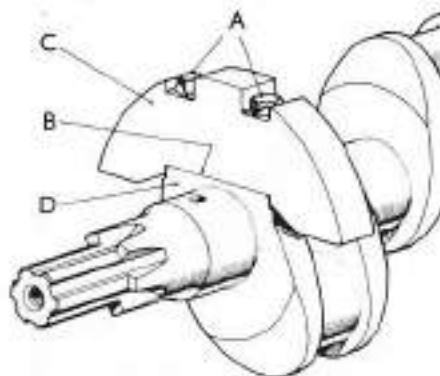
When counterbalance (C) retaining cap screws (A) are properly tightened, gap (B) between counterbalance weight and crankshaft (D) should not permit entry of 0.002 feeler gage.
